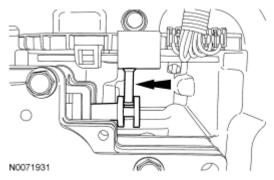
Identifying Manual Pin Courtesy of FORD MOTOR CO.
